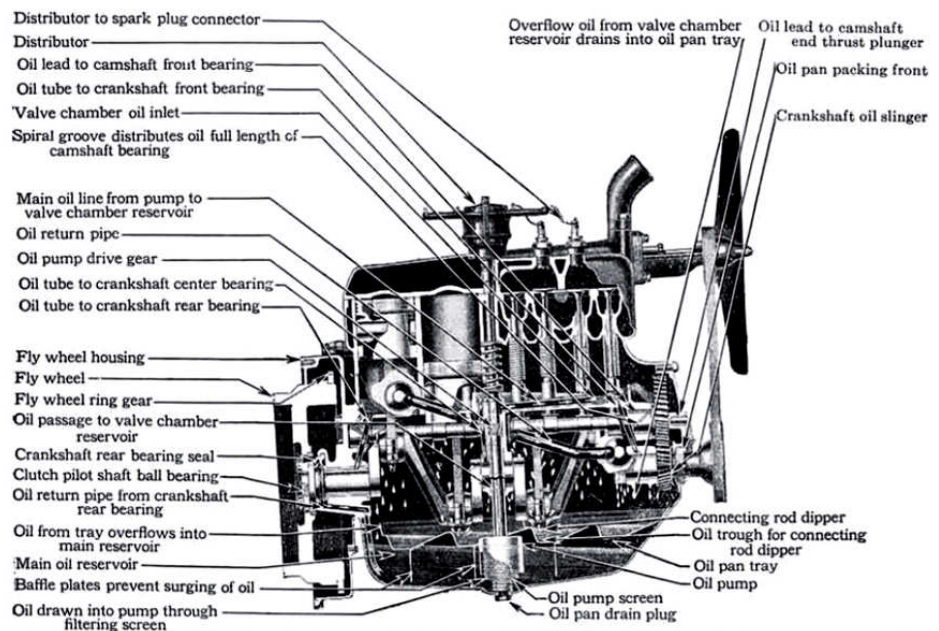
Engine lubrication system, Ford model "A." Engine rests in chassis on a 3 degree angle, sloping to the rear which gives a more direct drive to the rear axle eliminating friction and wear to a great extent.
